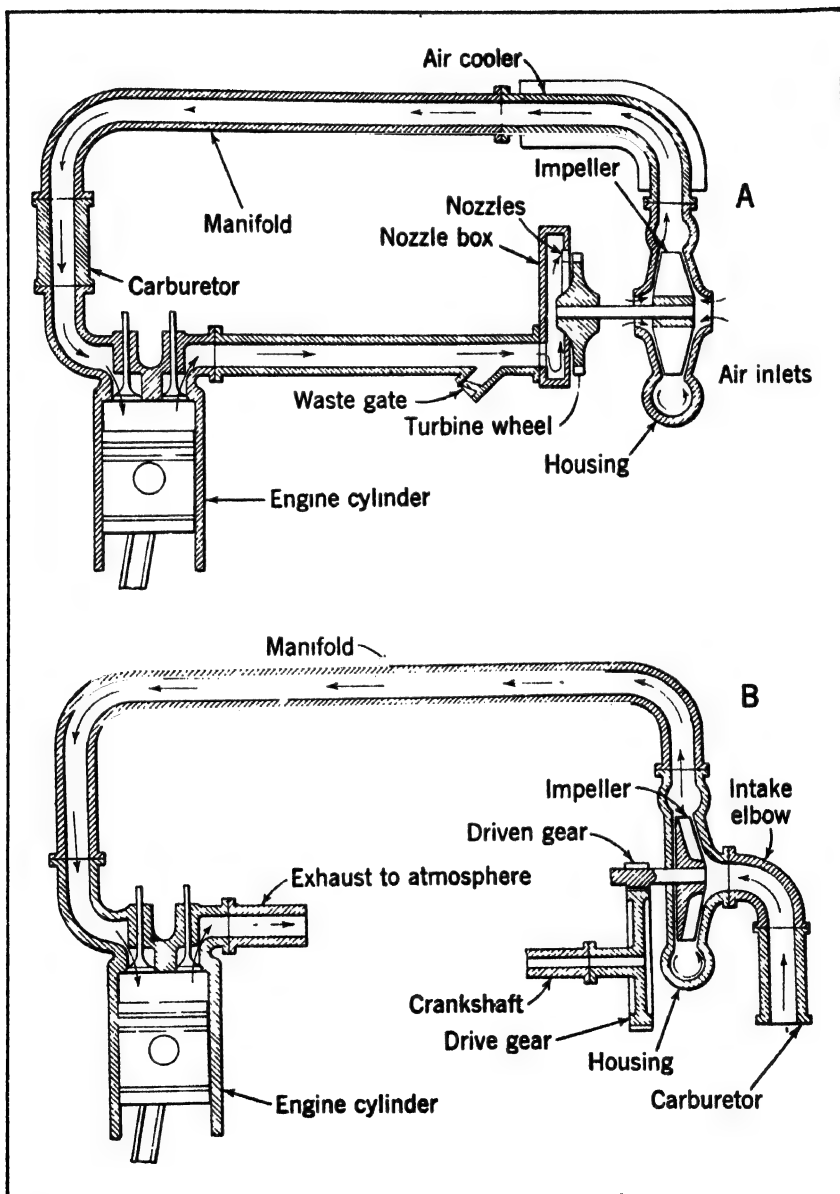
Simplified Diagrams Showing Methods of Driving Centrifugal Supercharger. A—By Exhaust Gas Driven Turbine. B—By Mechanical Gearing.
